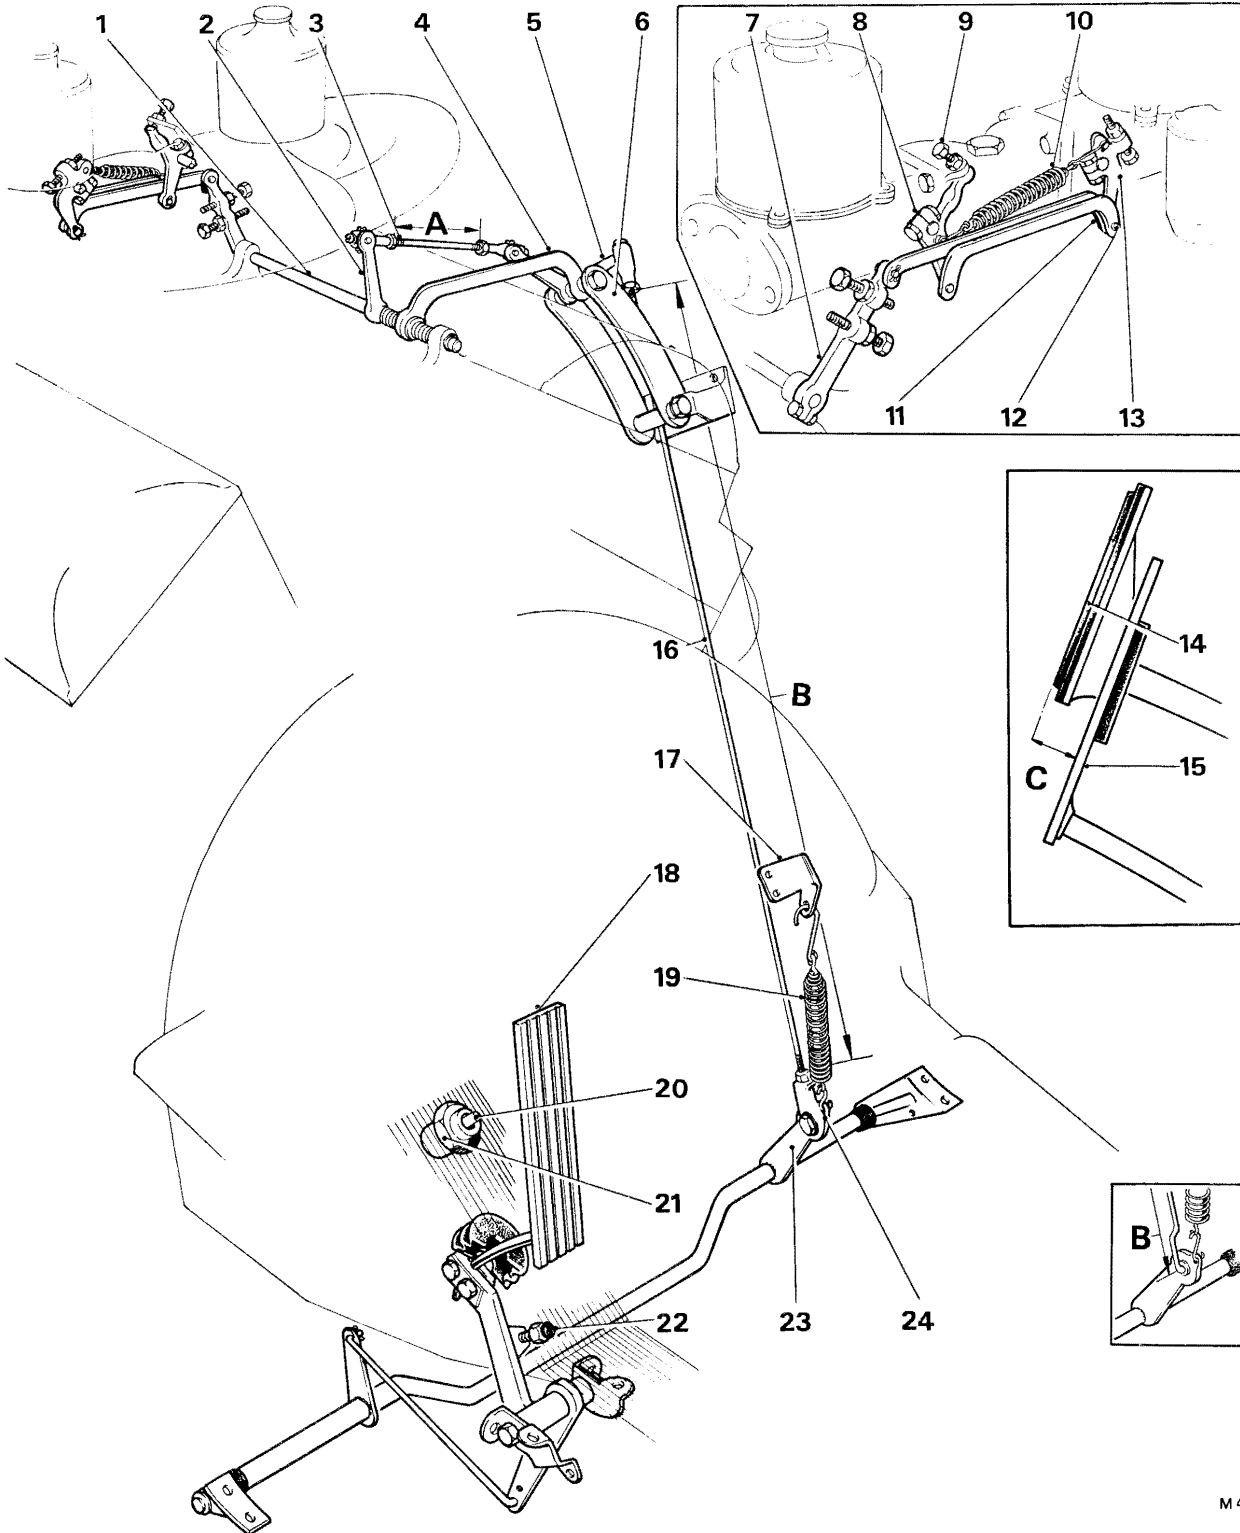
THROTTLE CONTROL LINKAGE—LATE R.H. DRIVE CARS
